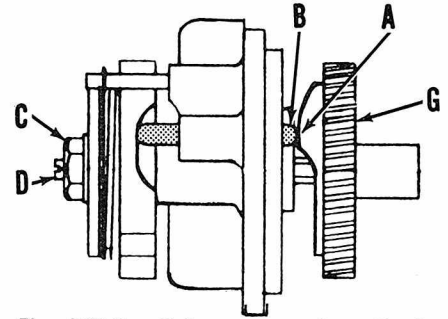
Refer to text for adjusting pump stroke. Cam (A) is part of gear (G).
